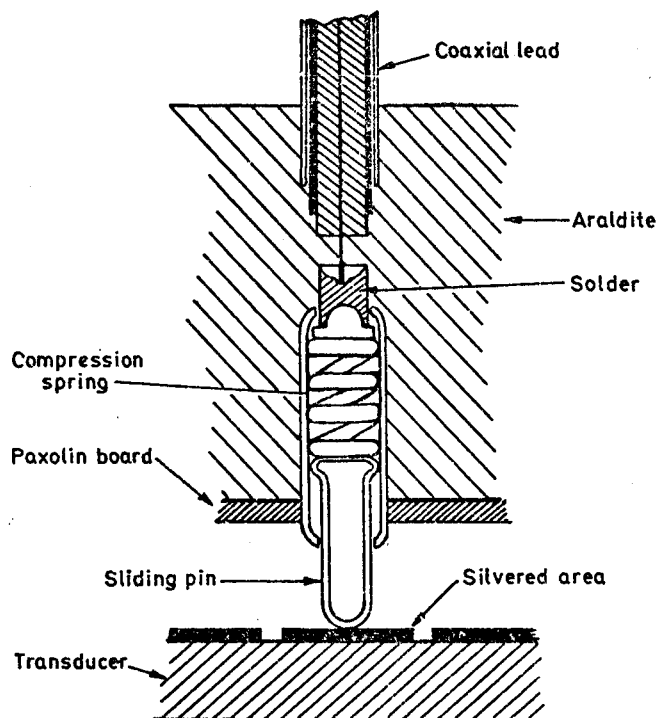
Enlarged cross-section through a single pin assembly, which is accurately spaced from its neighbours
